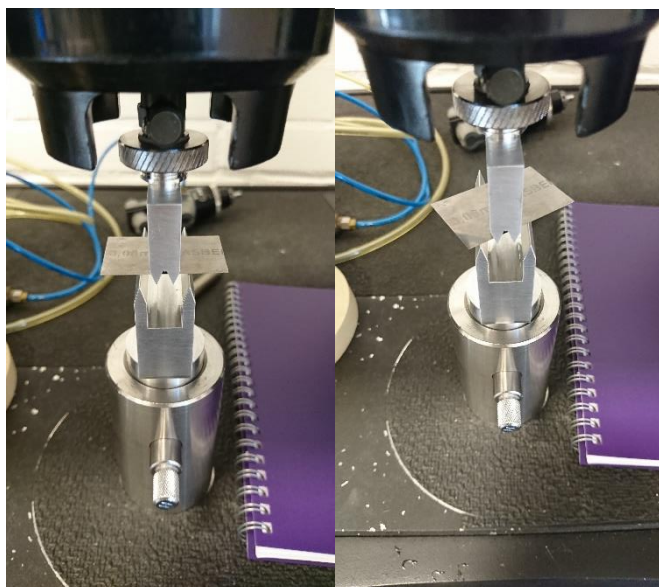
The picture to the left shows the test setup with the sample straight in the fixture and the picture to the right shows the test setup with an angled sample in the fixture.
